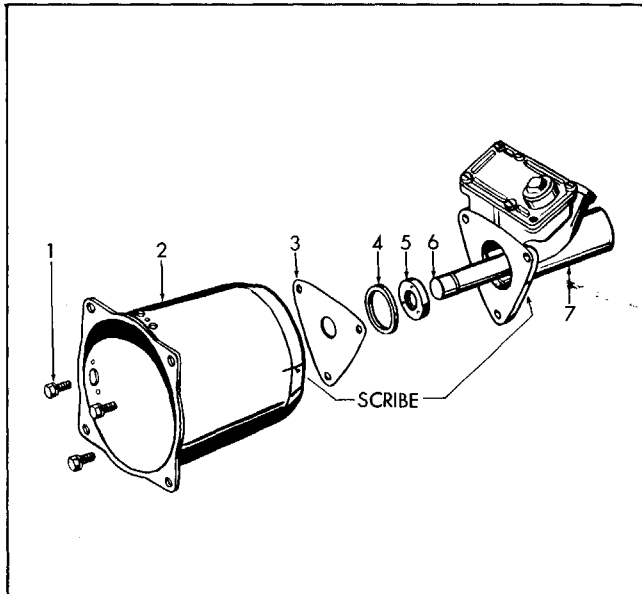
Removal of Vacuum Cylinder from Hydraulic Cylinder
